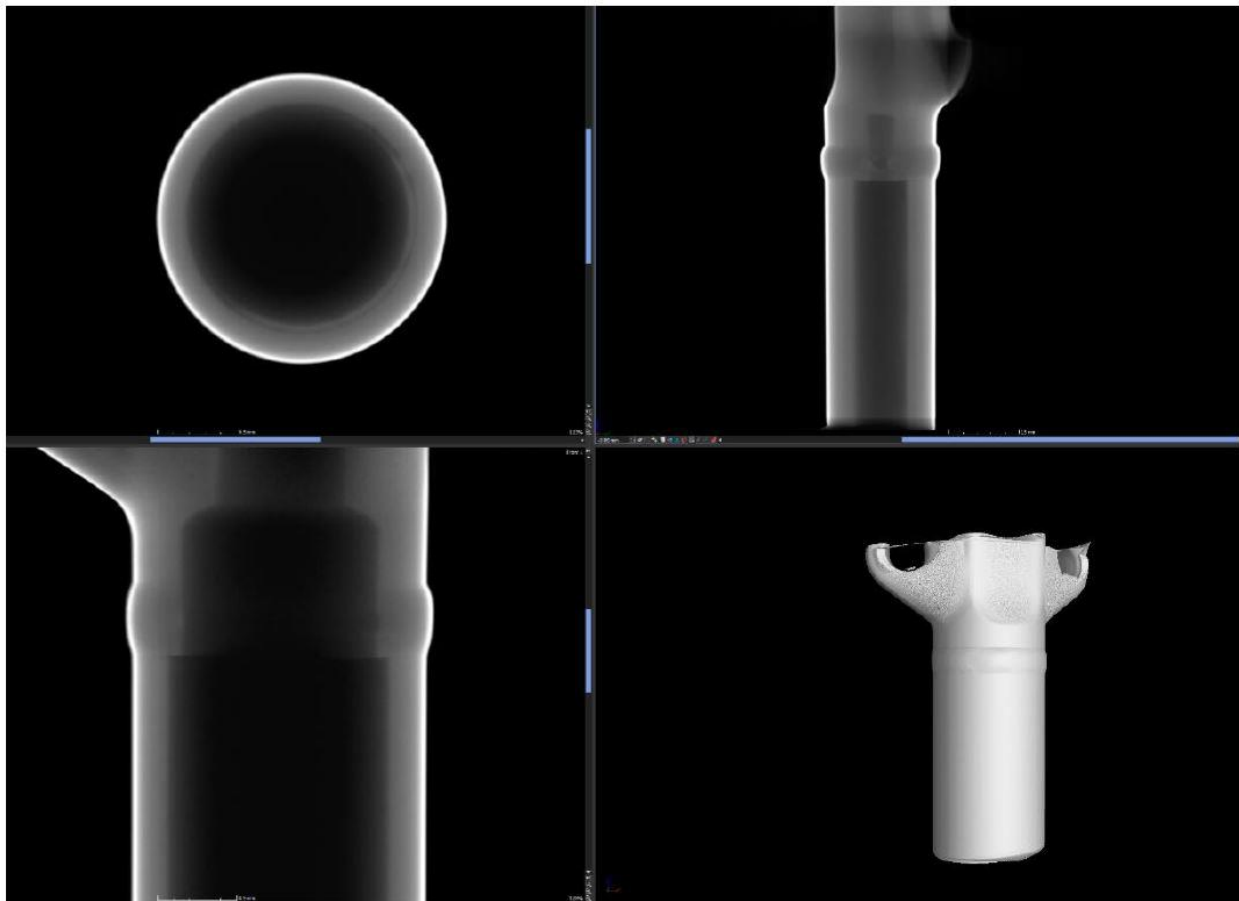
Tomography, Sample 1, Welding 1.
